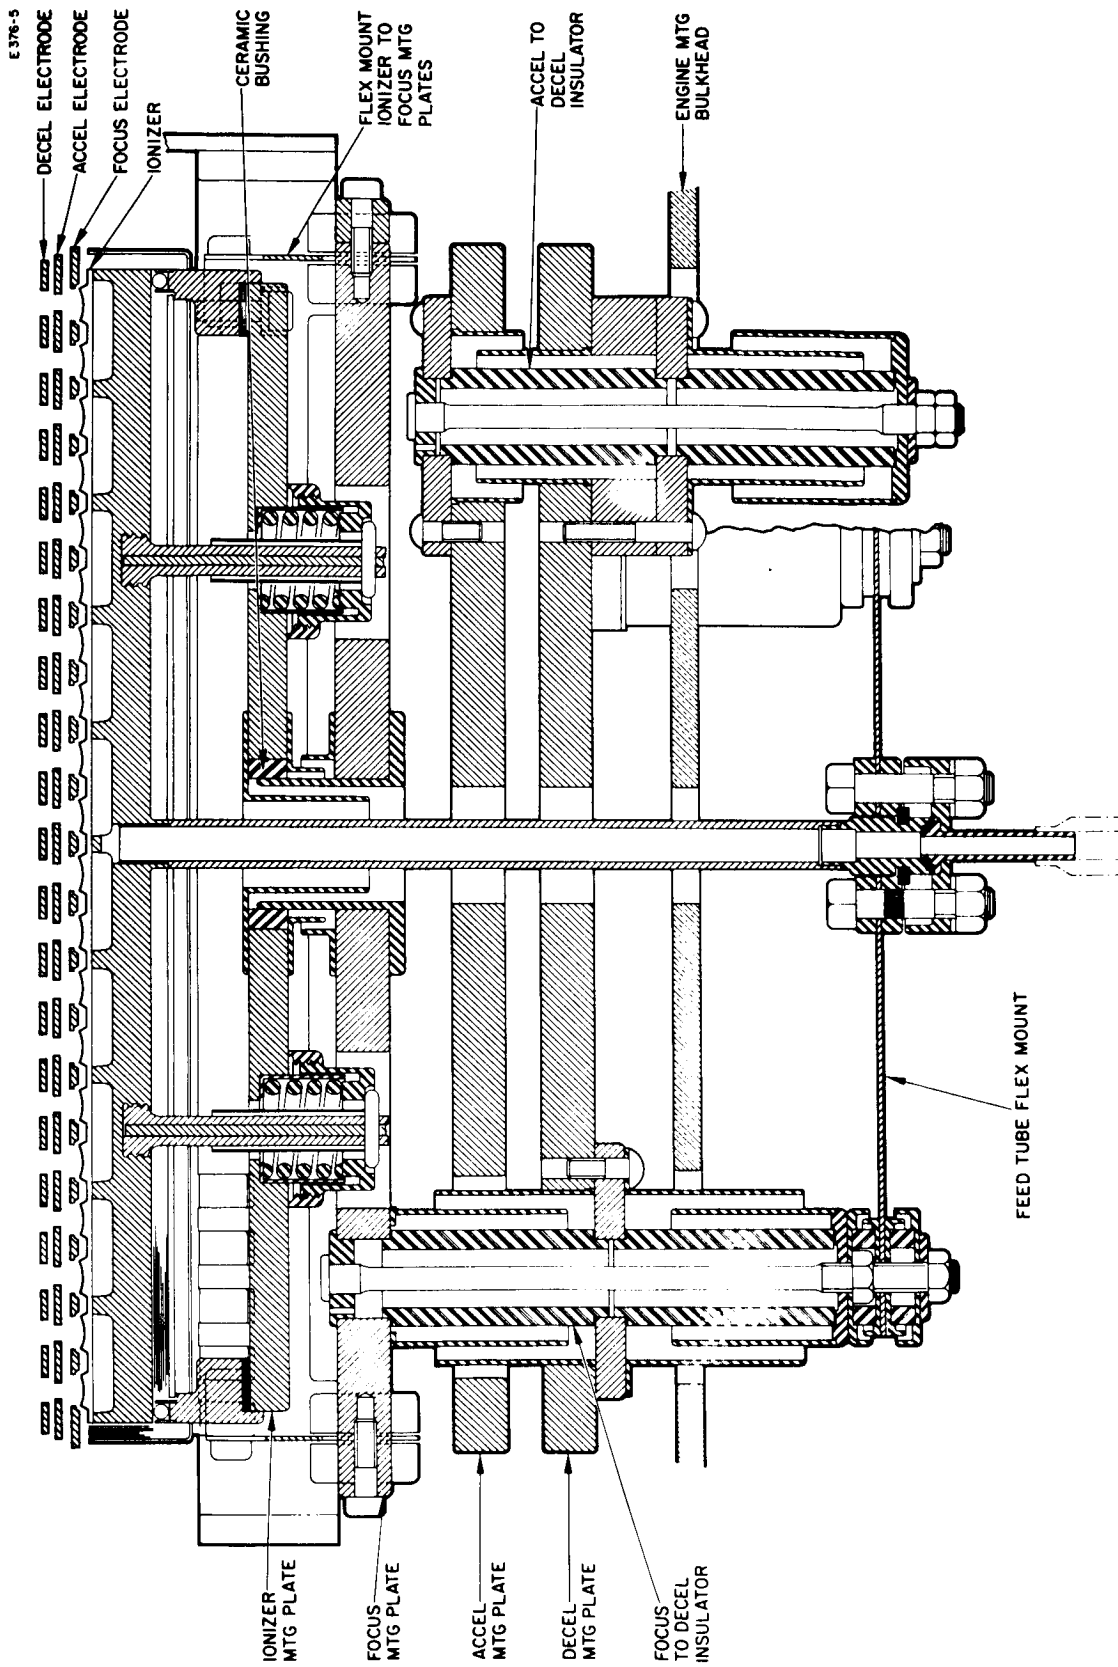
Side view of 20-strip engine design, with ionizer strips and electrodes perpendicular to the plane of the paper, showing the ionizer and electrode support structure.
